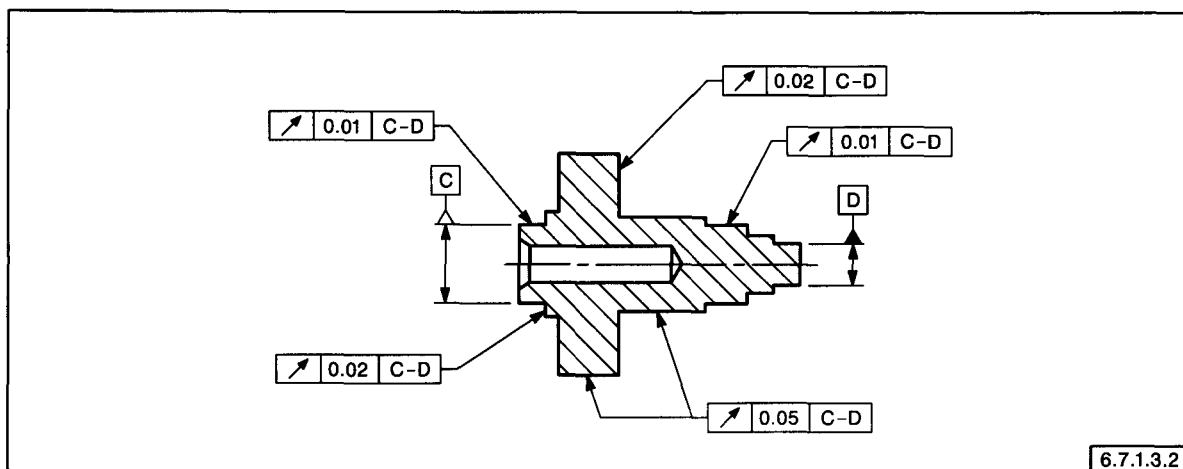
SPECIFYING RUNOUT RELATIVE TO TWO DATUM DIAMETERS
